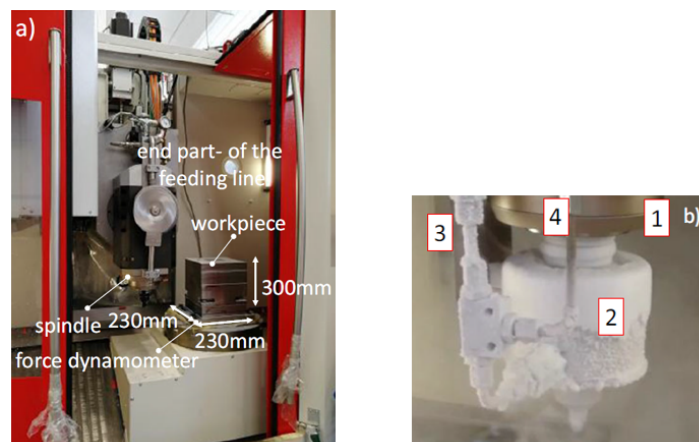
End part of the feeding line, workpiece, and force dynamometer + Cryogenic head.
